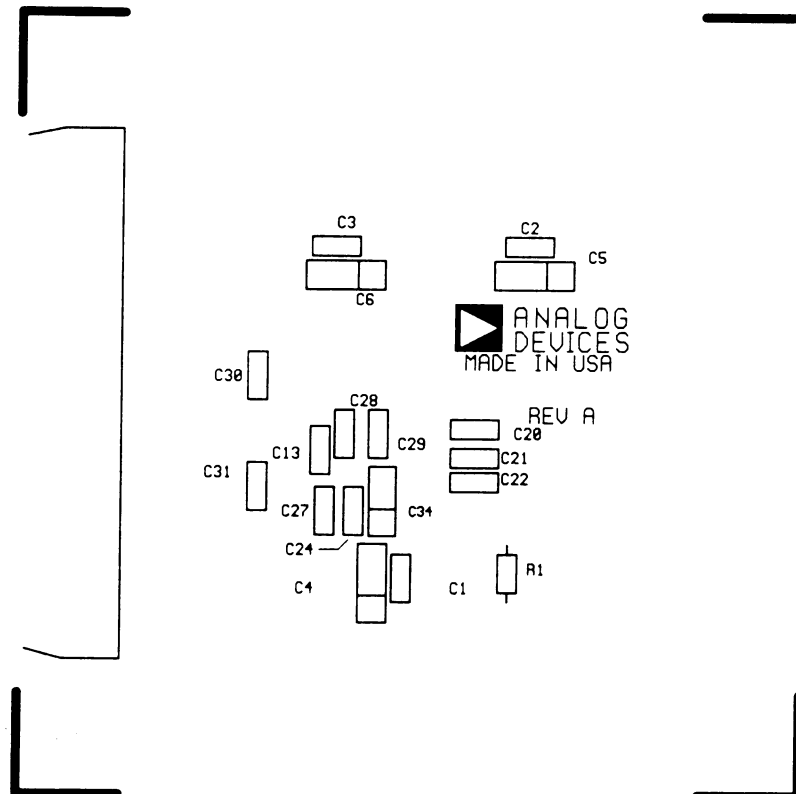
Silkscreen Layer, Circuit Side PCB Layout
